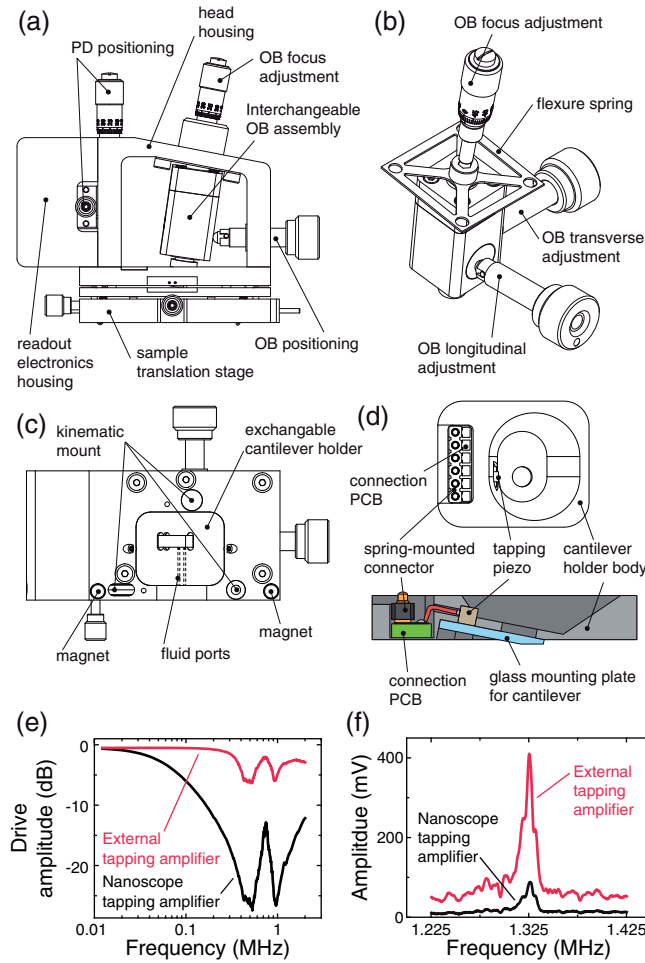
Technical drawings of the head showing the major features and subassemblies. (a) Front view. (b) Optical beam deflection assembly with focusing and translation adjusters. (c) Bottom view of the head without the translation stage. (d) Section view of the cantilever holder. (e) Performance of the tapping piezo drive (standard drive from the Nanoscope controller and external buffer drive). (f) Excitation of a FastScan A cantilever with the standard Nanoscope and external buffer drive, using a 1 V drive signal amplitude.
